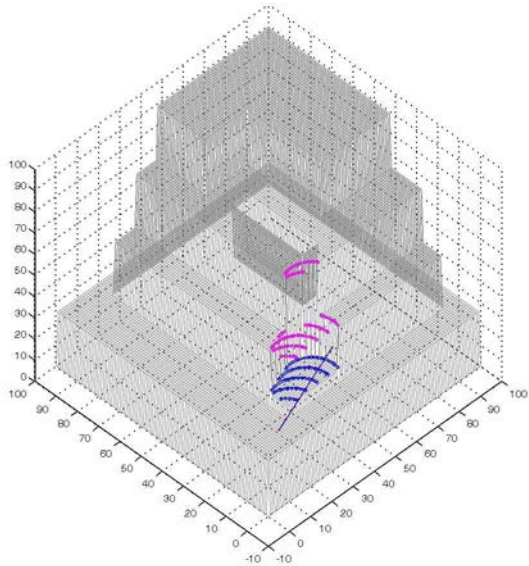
Bottom and top contact lines formed in consequent tool rotations at the first tool path segment
